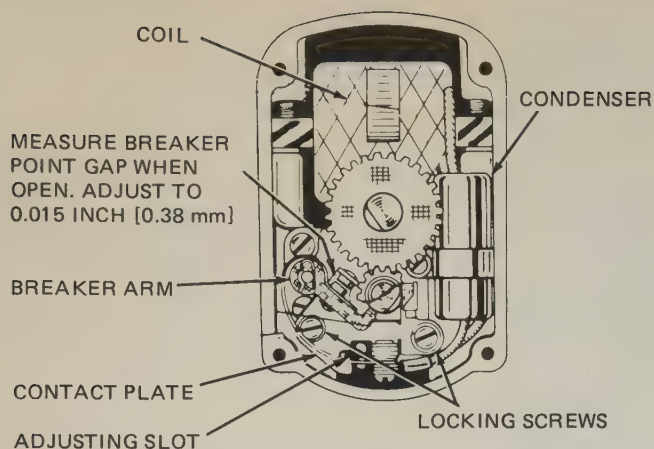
The end view of an externally mounted magneto with the end cap removed. (Wisconsin Motor Corporation)
